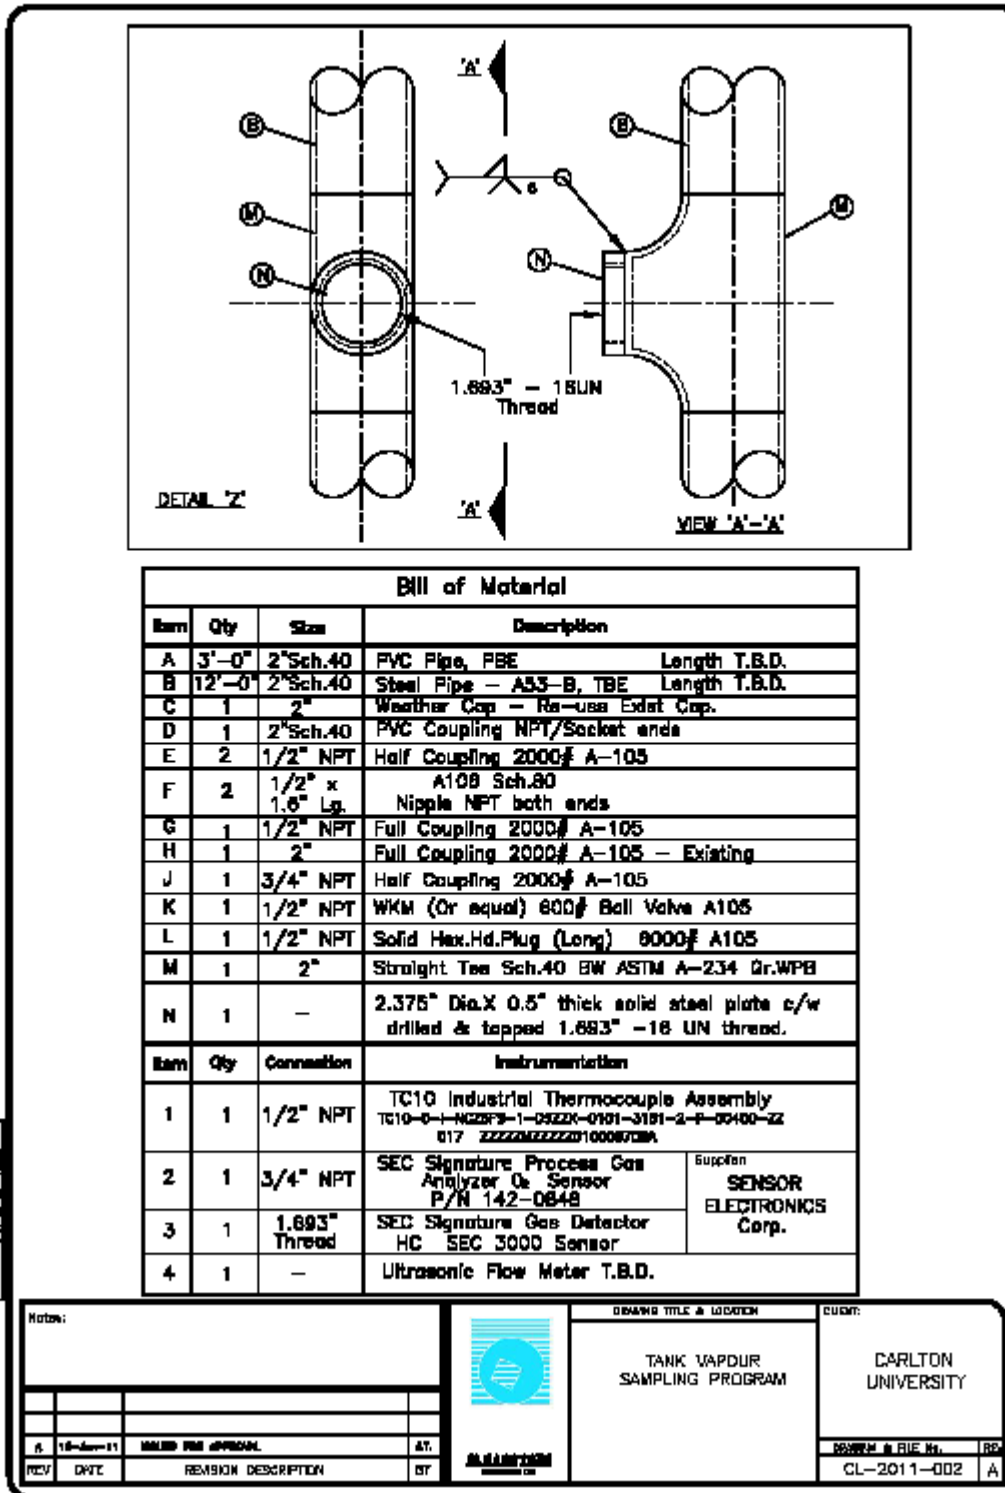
Mechanical drawing (Part 1) of the custom vent stack assembly.
